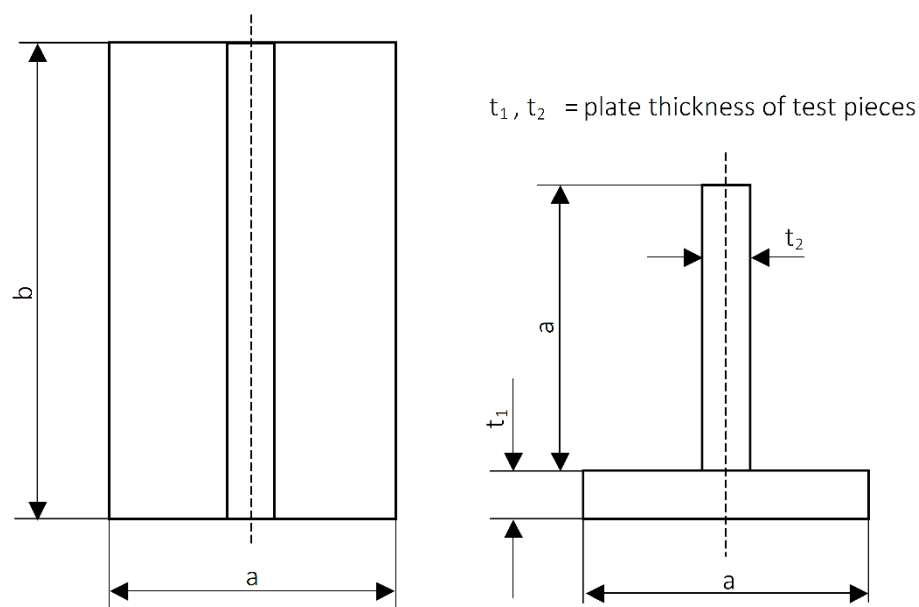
Test assembly for fillet weld in welding positions PA, PB, PD, PF
